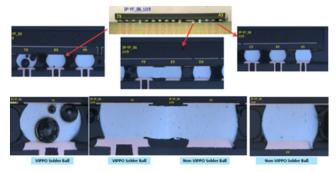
Solder Voiding and Bridging with Solder Joint Encapsulant Material B on DDR4 TV
